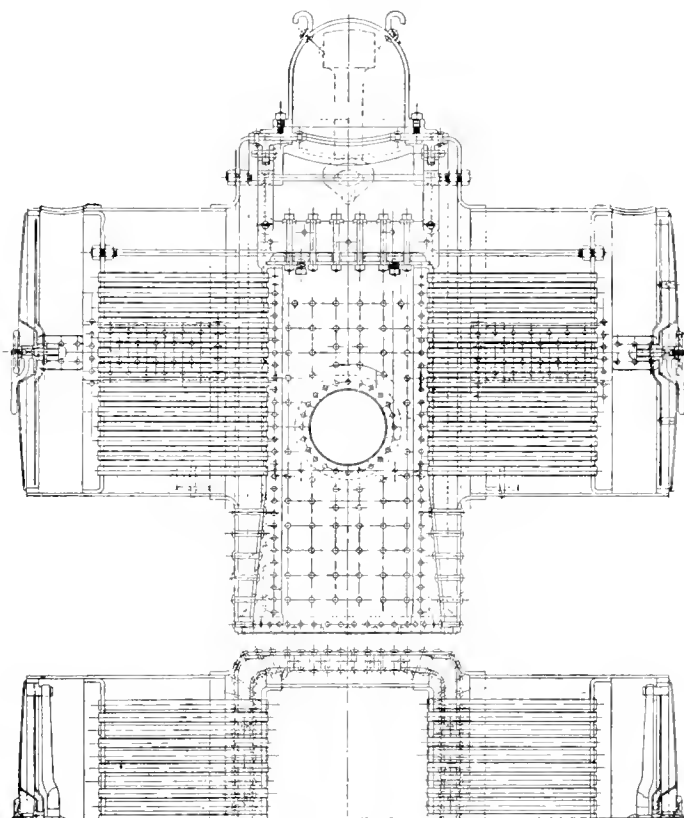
BOILER ON TAFF VALE MOTOR CAR.
